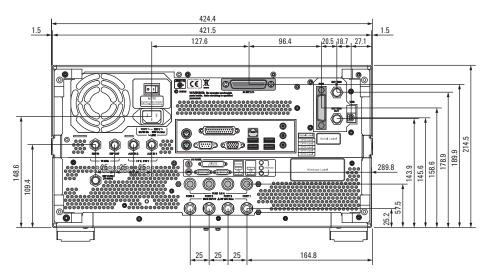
Dimensions (rear view, with option 1E5, in millimeters)
